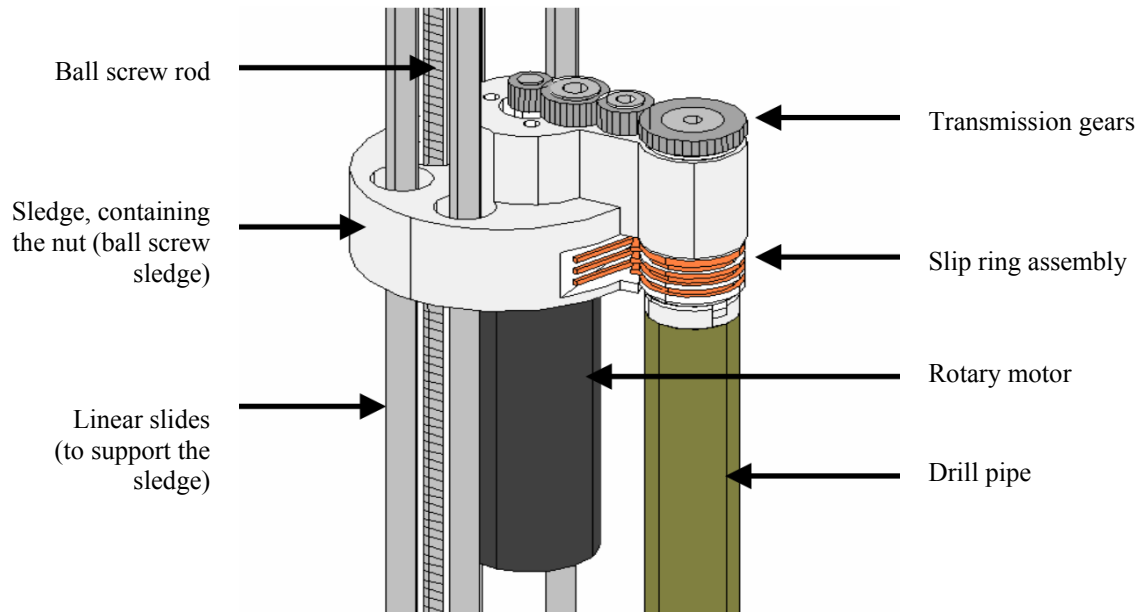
a) The MRoSA2 sledge and spindle principle, with a drill pipe connected to the spindle. (Image: VTT, MA).
